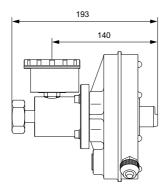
Vacuum regulator VGA-146 (mounting on header lines)
